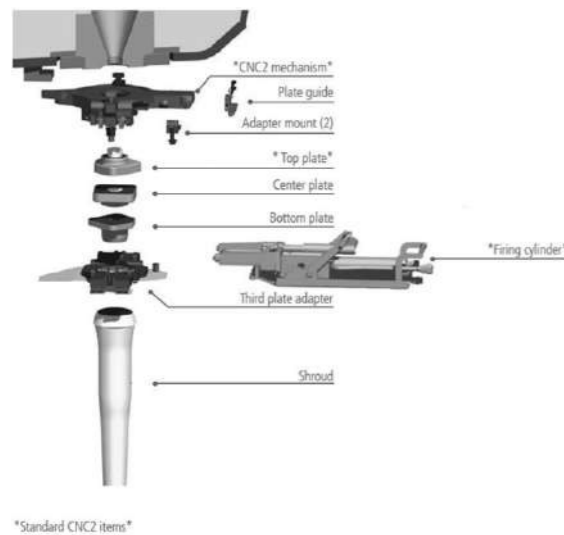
Stack up of refractories and mechanical parts for the CNC Shrouded.
